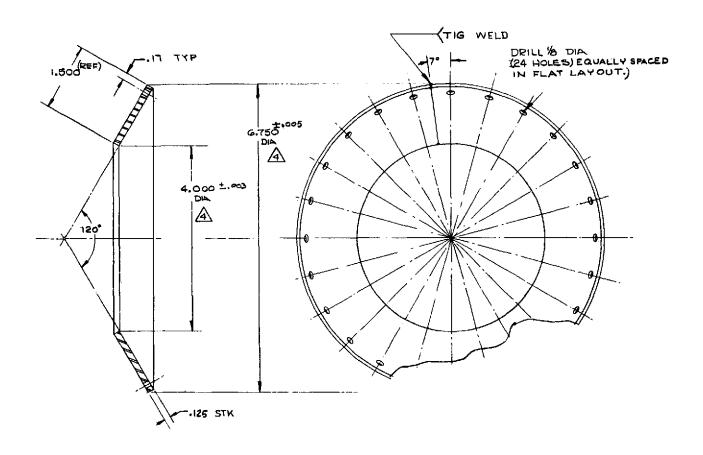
Assembly, body, separator - 100 kW erosion loop
